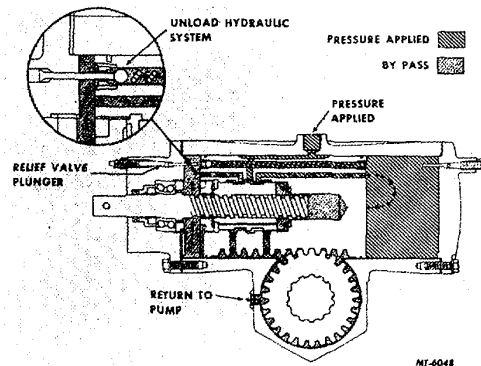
Sectional View of Steering Gear Assembly in Applied Position
